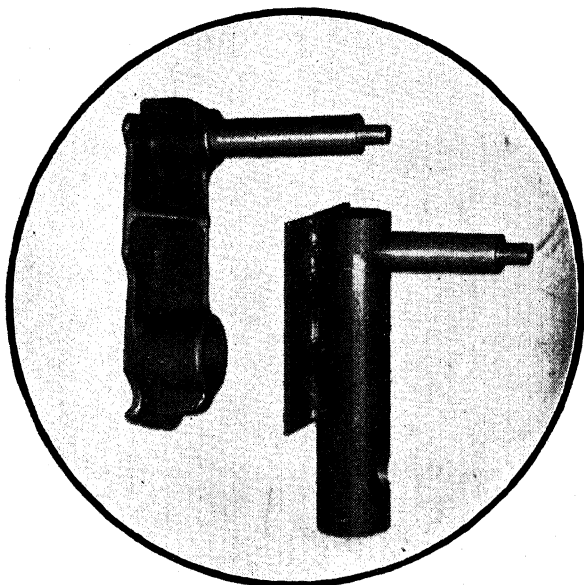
Bearing for a cement buggy. Former construction, shown on left, weighs 12 lbs. Welded steel construction weighs $8\frac{1}{4}$ lbs. and is unbreakable. Welding eliminates five drilling operations and one slotting operation.
